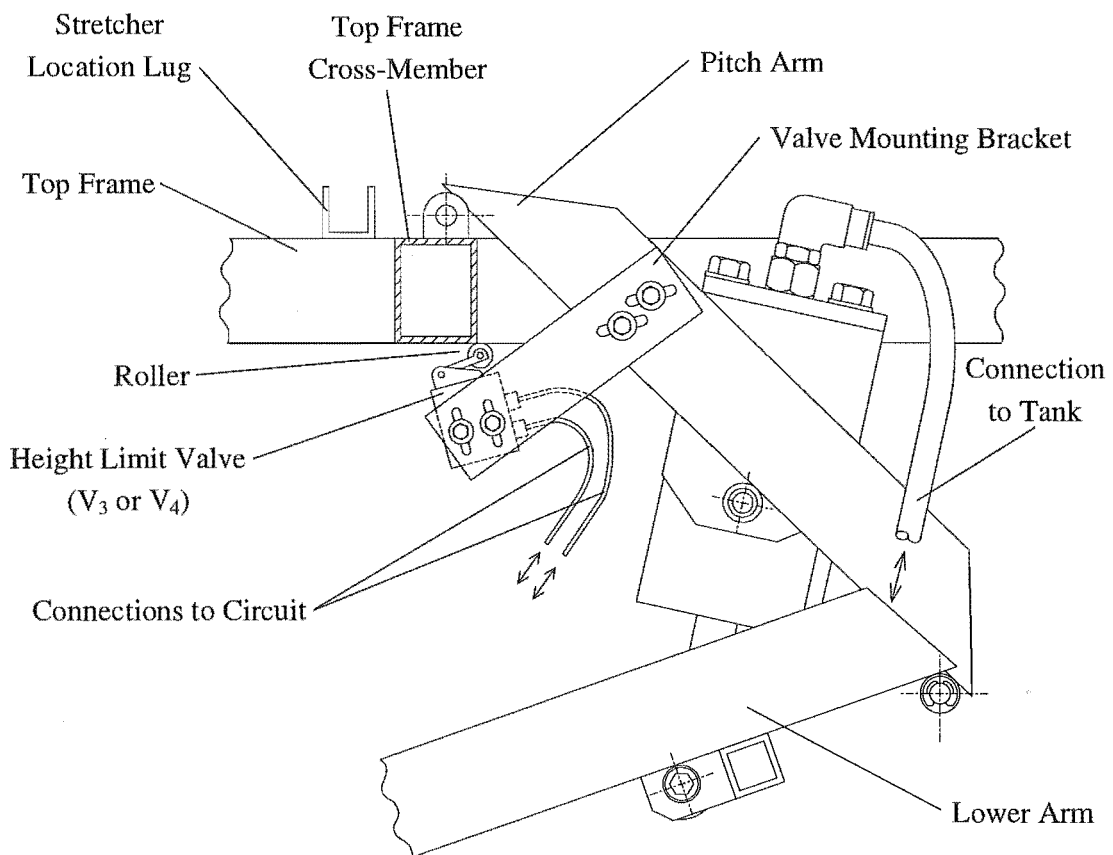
Schematic Showing Contact of Limit Valve Roller With Top Frame
